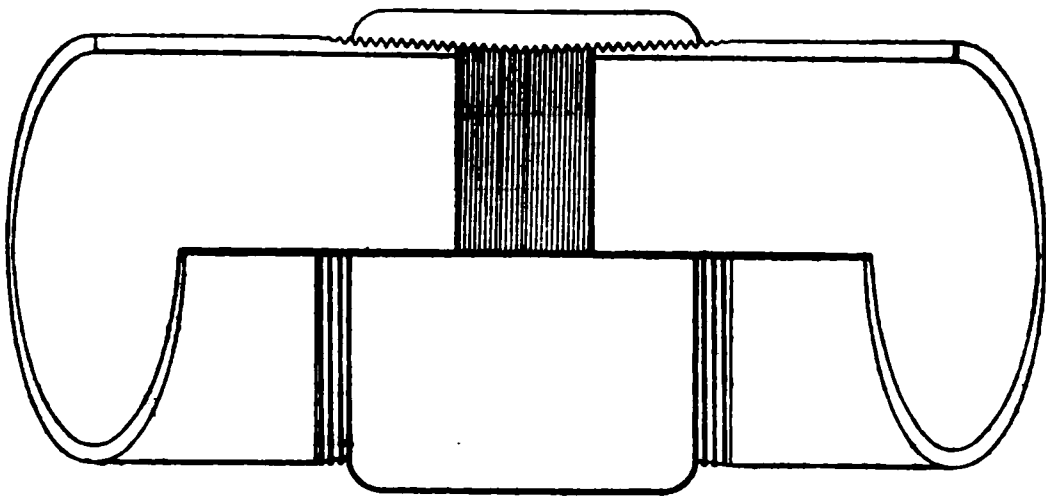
Typical Section of Dry Kiln Pipe Coupling and Joint
